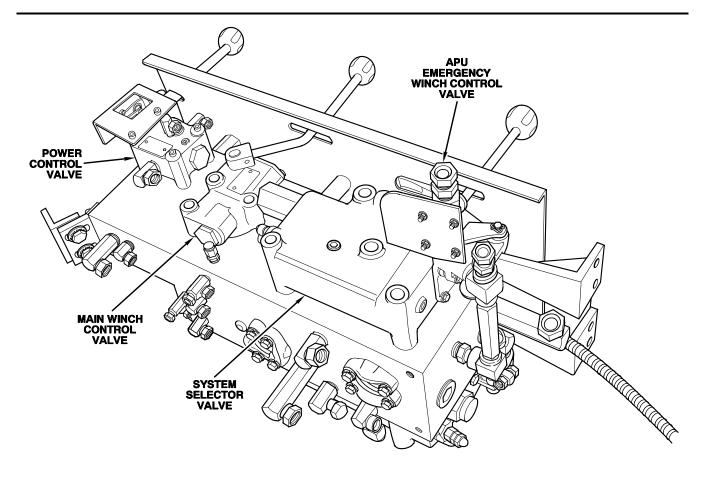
Hydraulic Subplate Assembly—Right-Front View.
